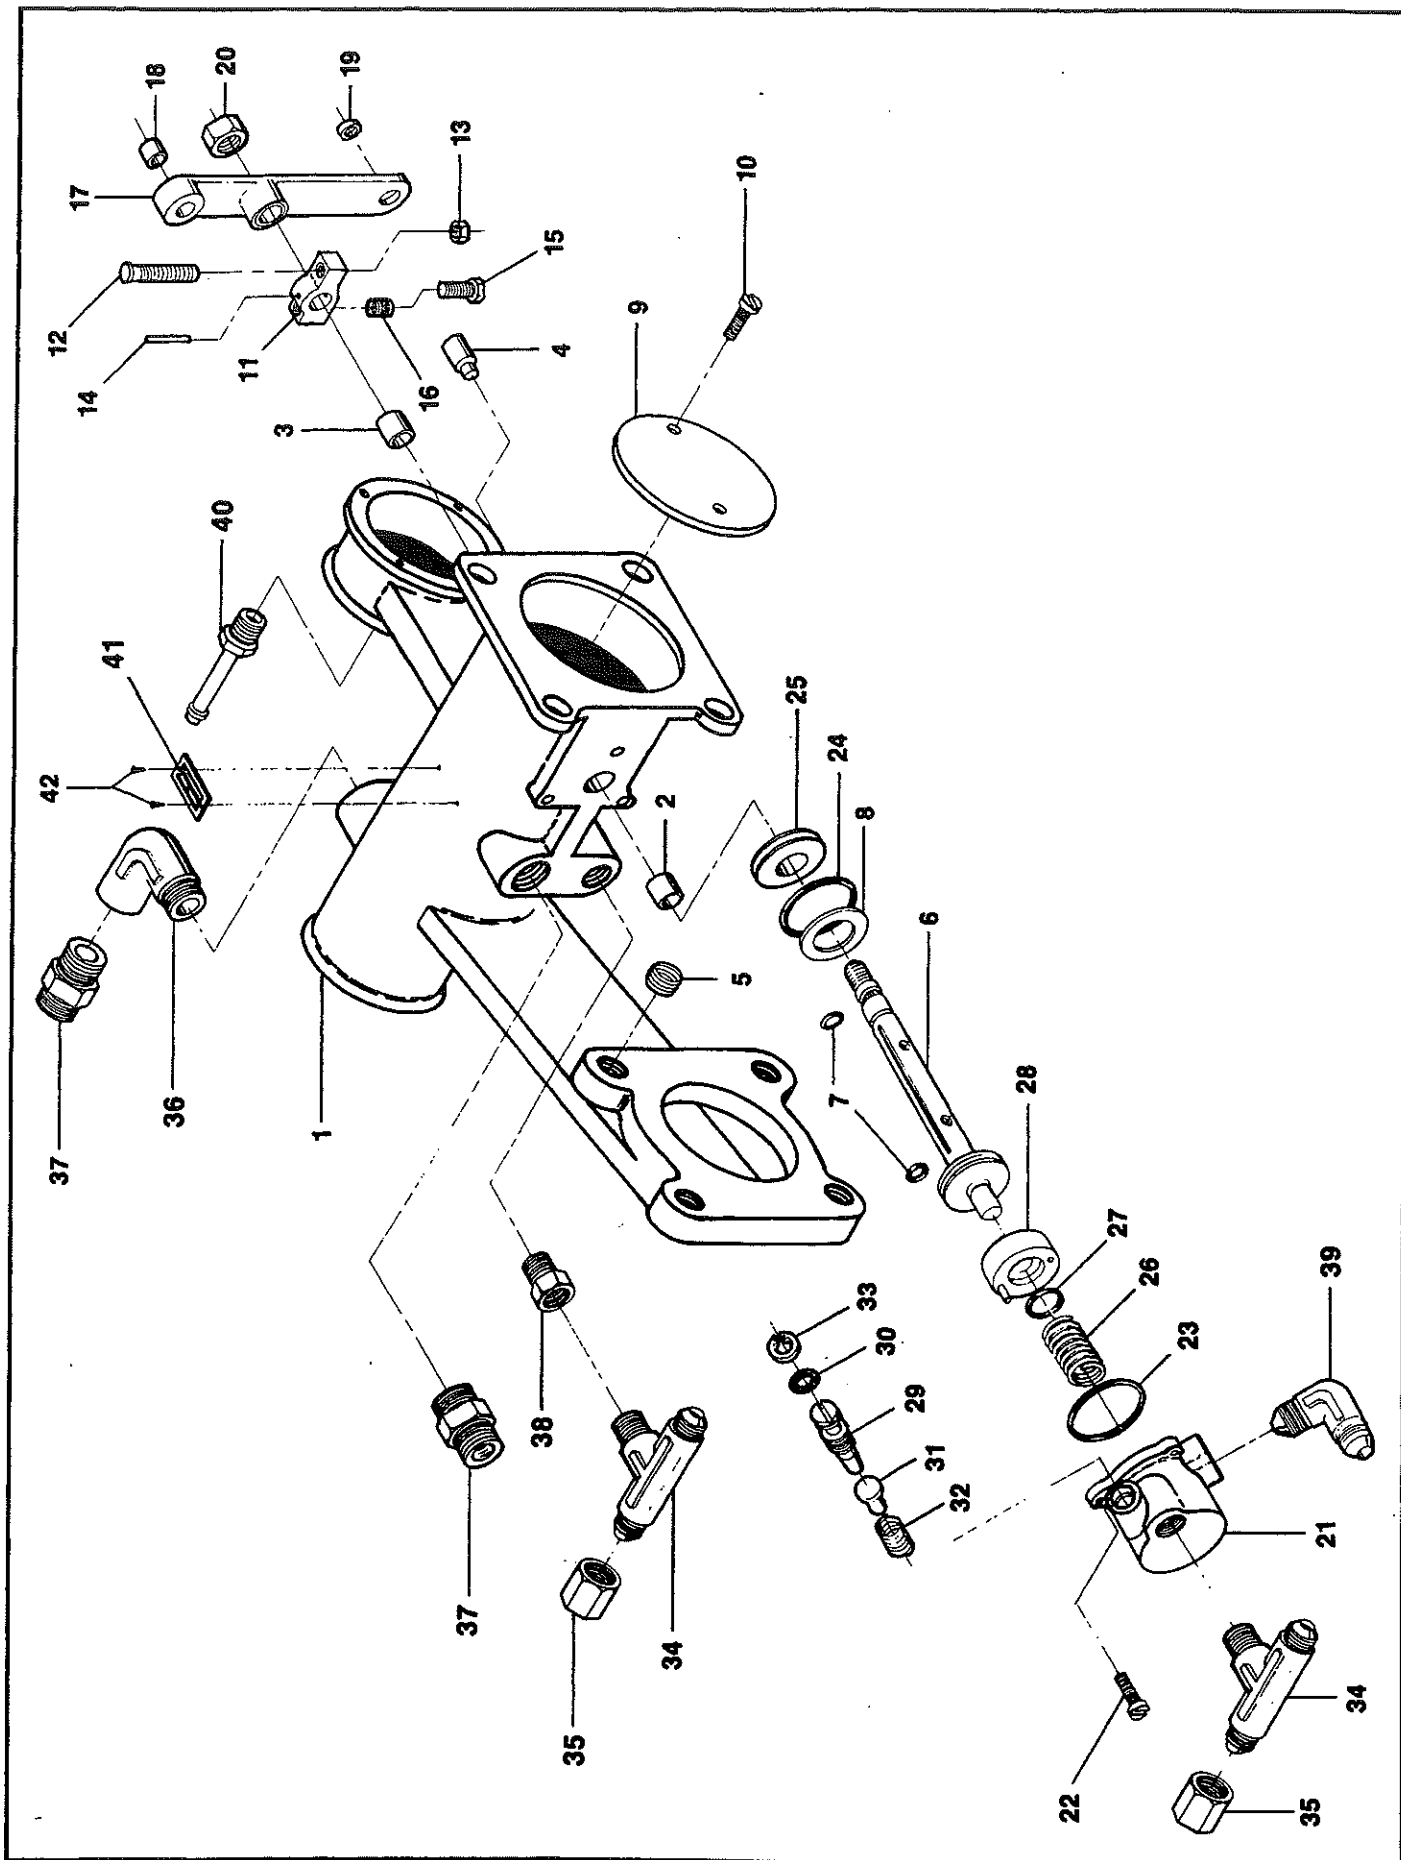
AIR THROTTLE AND FUEL METERING ASSEMBLY.
